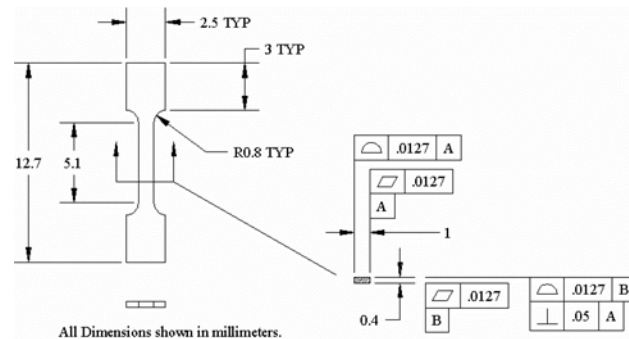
A detailed drawing of the miniature tensile specimen. All dimensions are in millimeters.
